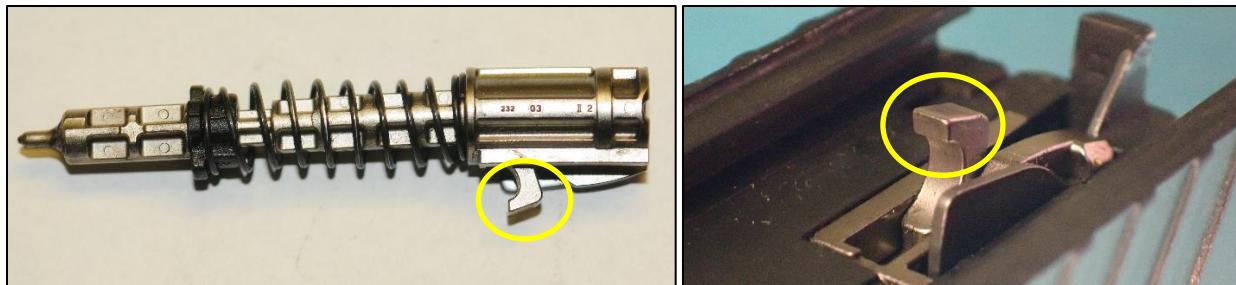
Striker assembly with striker foot circled (left), striker assembly in the slide assembly (right)
